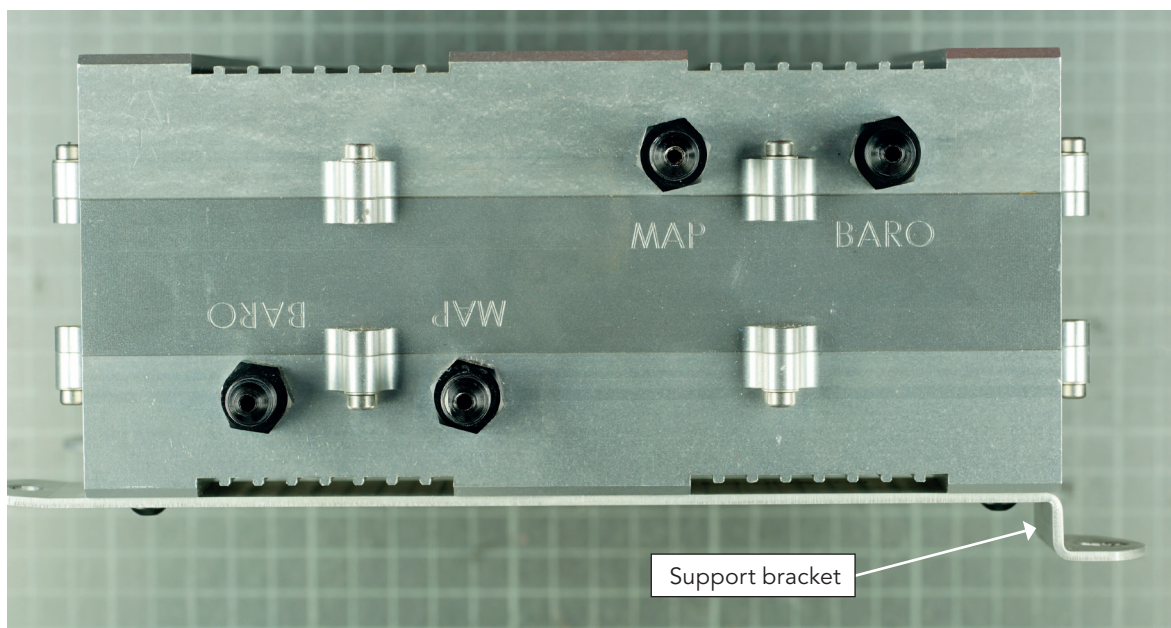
Support bracket fitted to the FADEC. (Source: Technify Motors)
